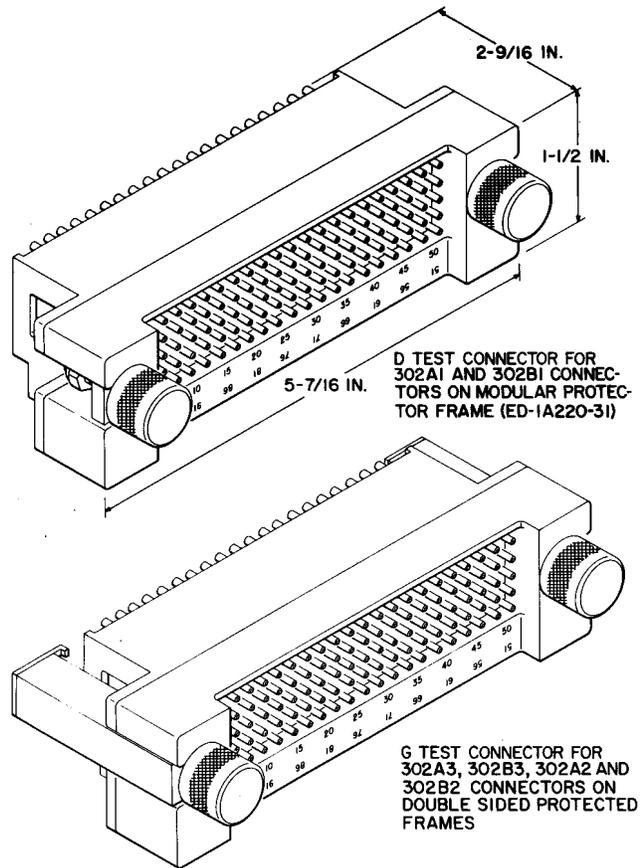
D and G Test Connectors—Mounting Arrangement
